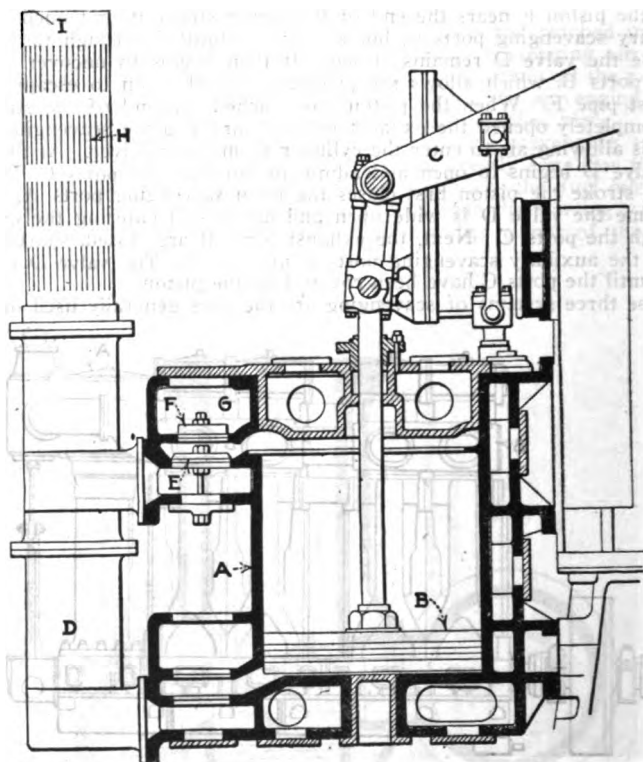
CROSS-SECTION OF TYPICAL SCAVENGING PUMP.
